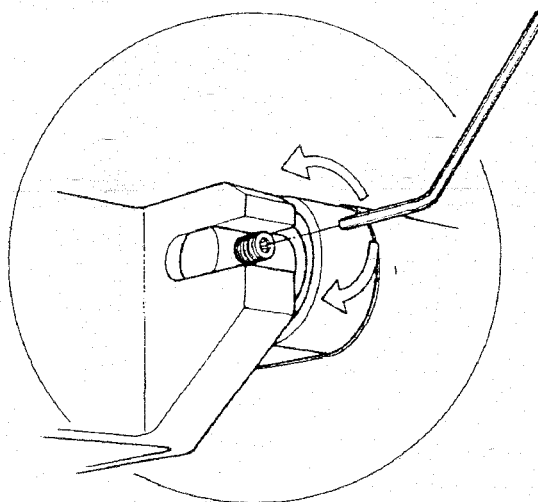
Detail of the roller adjustment and disassembling screw.
